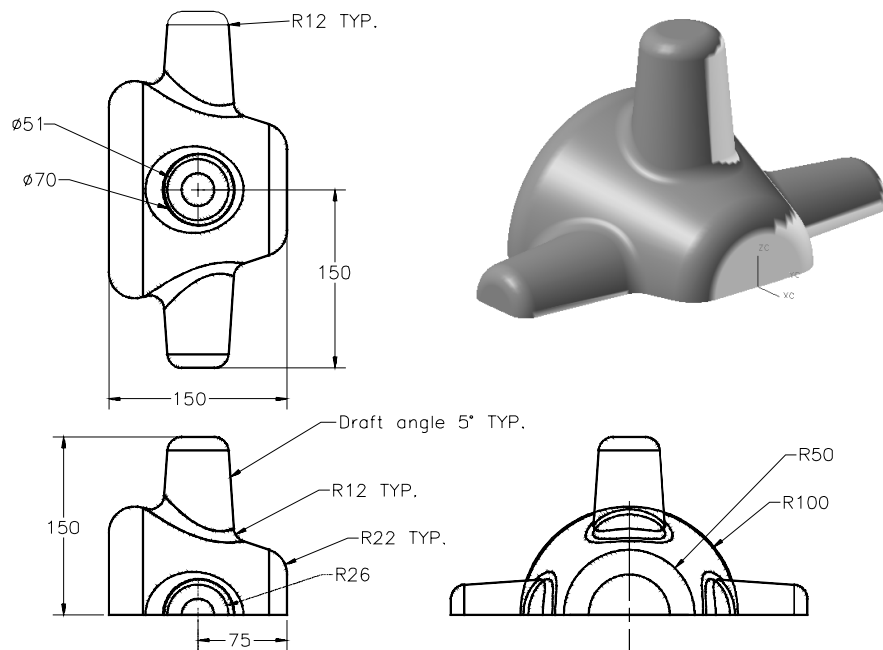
Drawing views and dimensions of the surface model for Exercise 1
